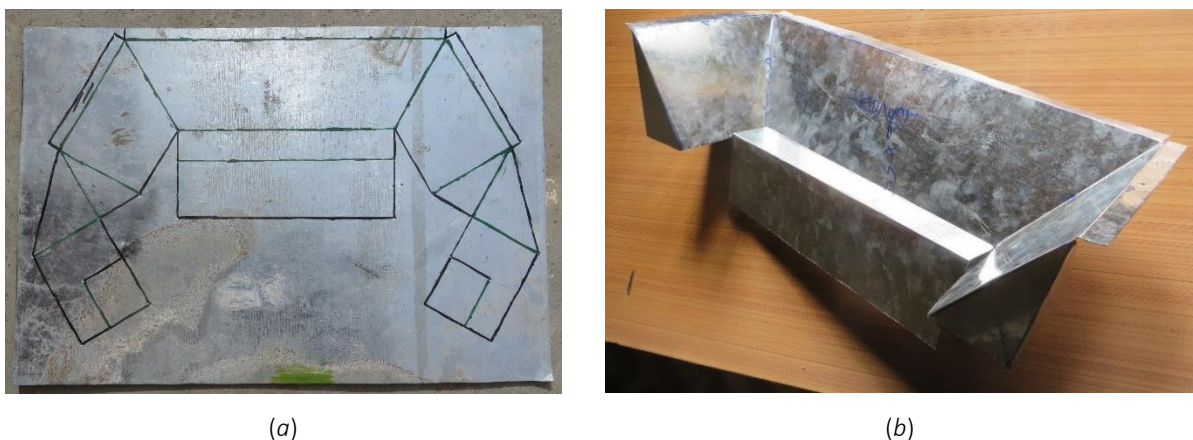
Parametric Sheet Metal Template (a) and Finished Piece for Solar Cooker (b)
